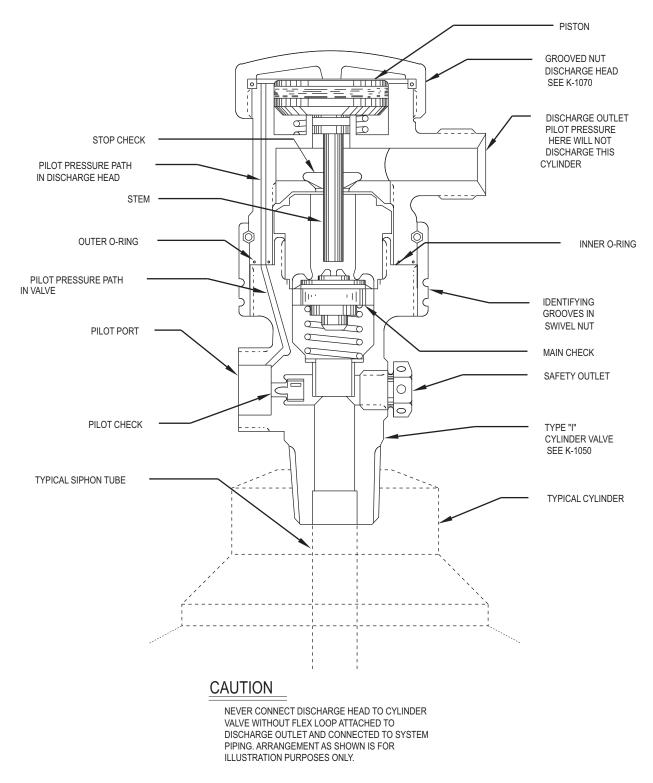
Installation of Grooved Nut Discharge Head to Cylinder Valve
